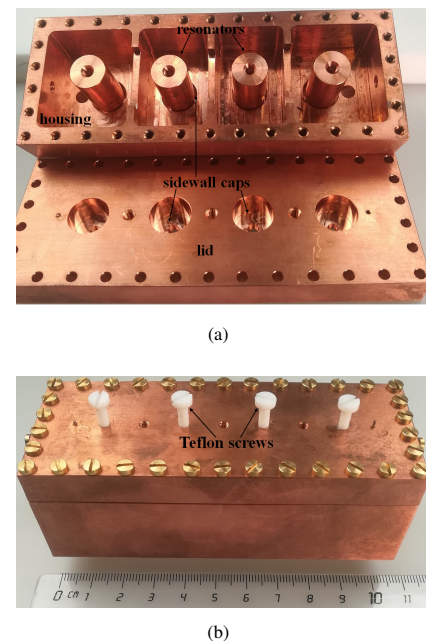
The fabricated four-pole tunable inset filter. (a) Disassembled and (b) assembled.
